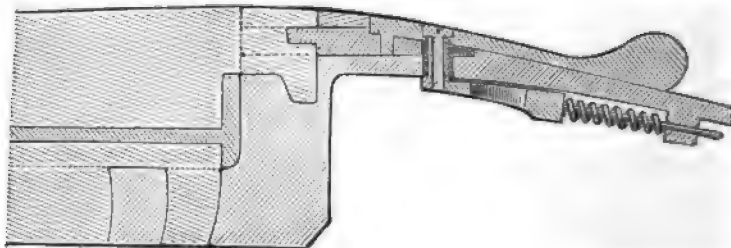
WEBLEY'S NO. 6 PLAN OF TOP BOLT.
